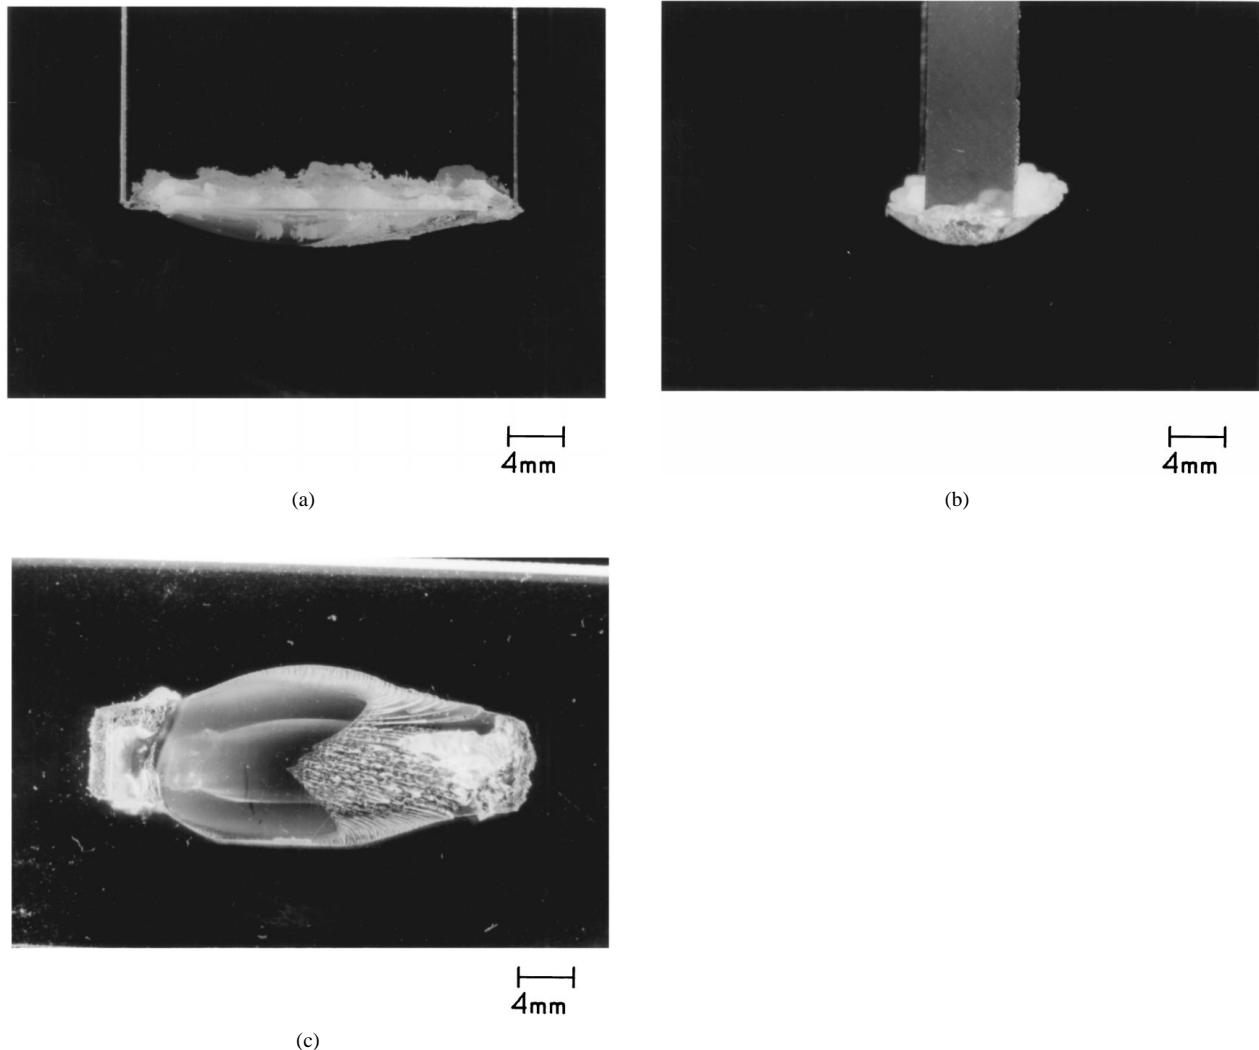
Failure surface of a PC (5.8, 5.8) mm web-flange combination T-joint: (a) and (b), front and side views of the web, respectively; (c), top view of the failure surface of the flange.
